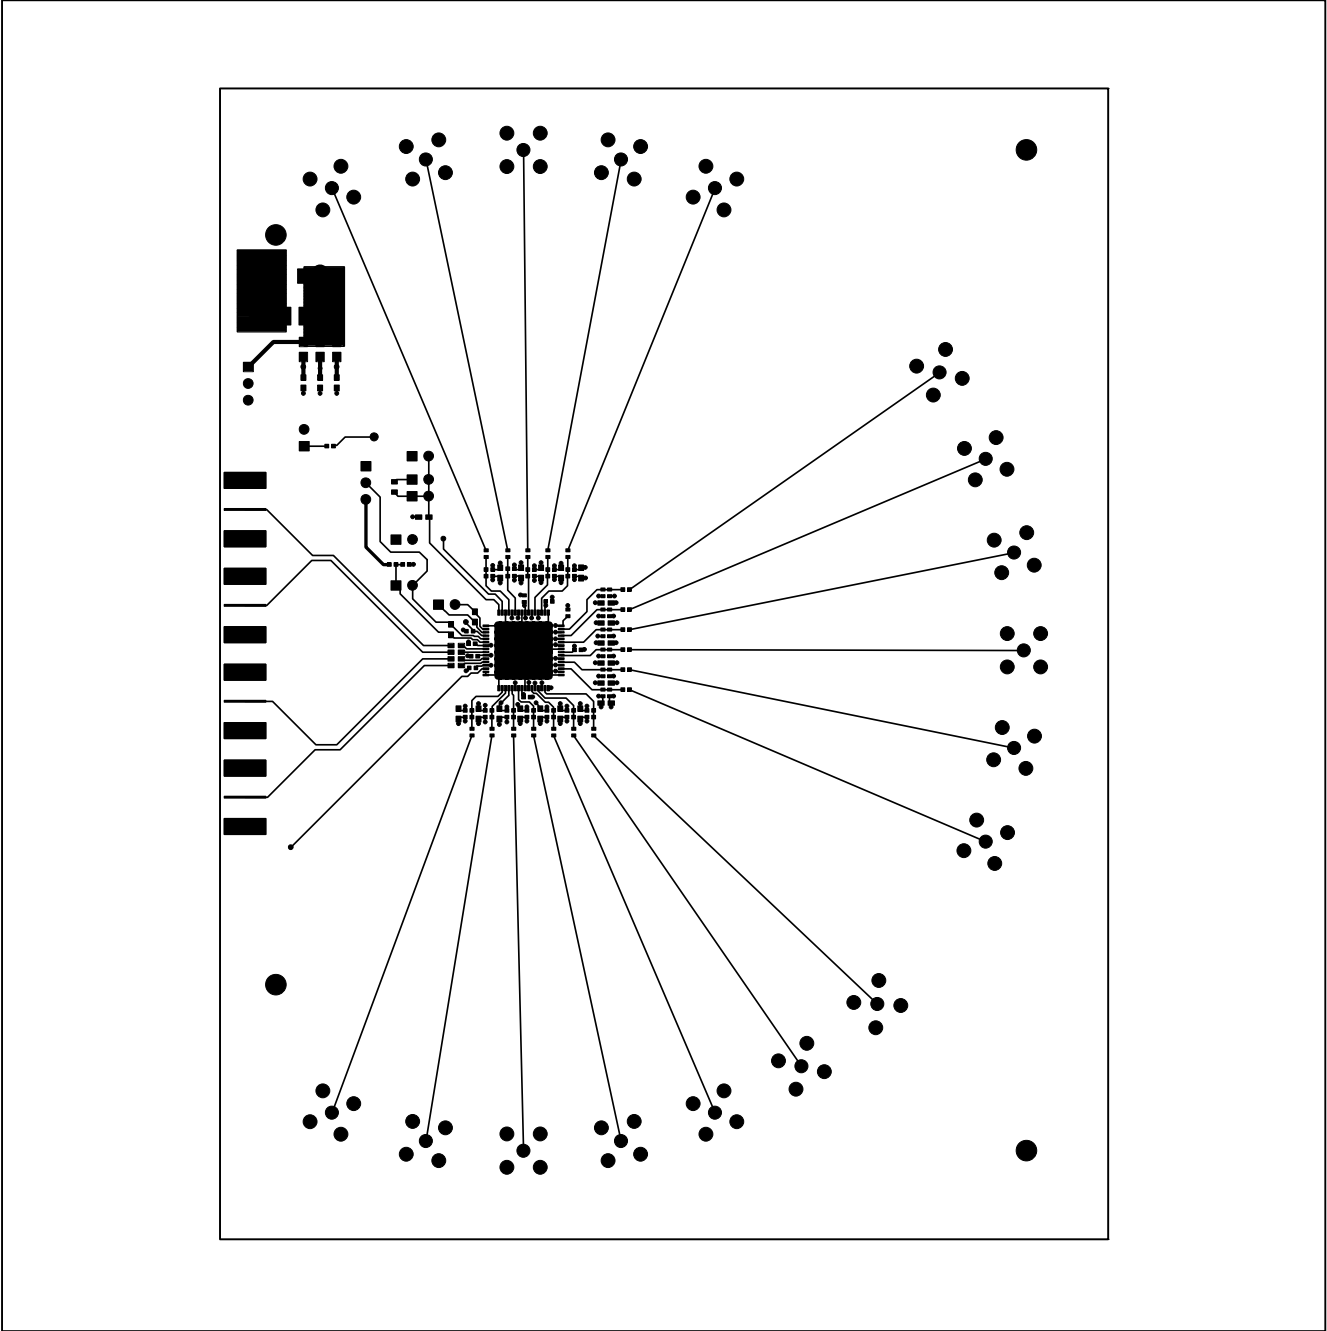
MAX3881 EV Kit PC Board Layout—Component Side
